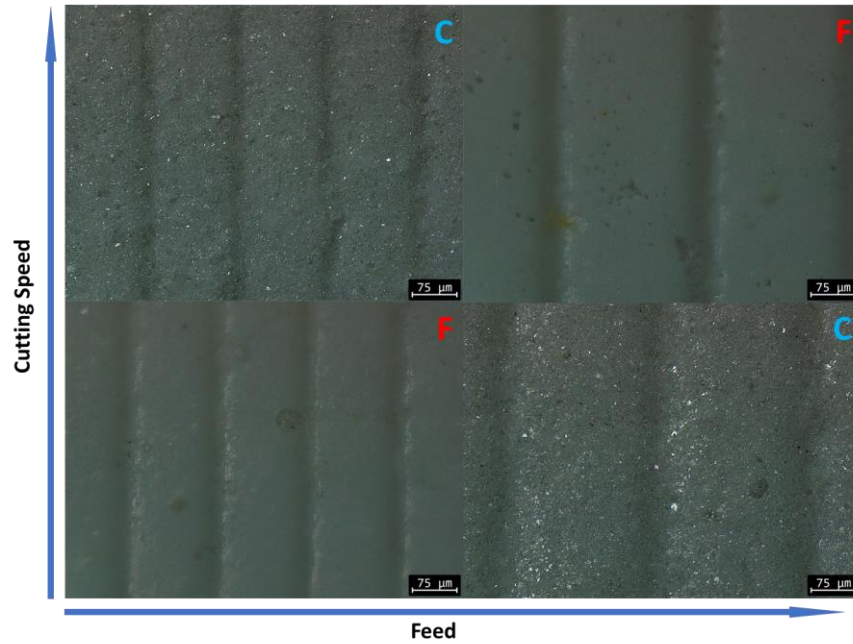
Optical images of samples machined with 0 degree rake angle tool and HMC binder.
